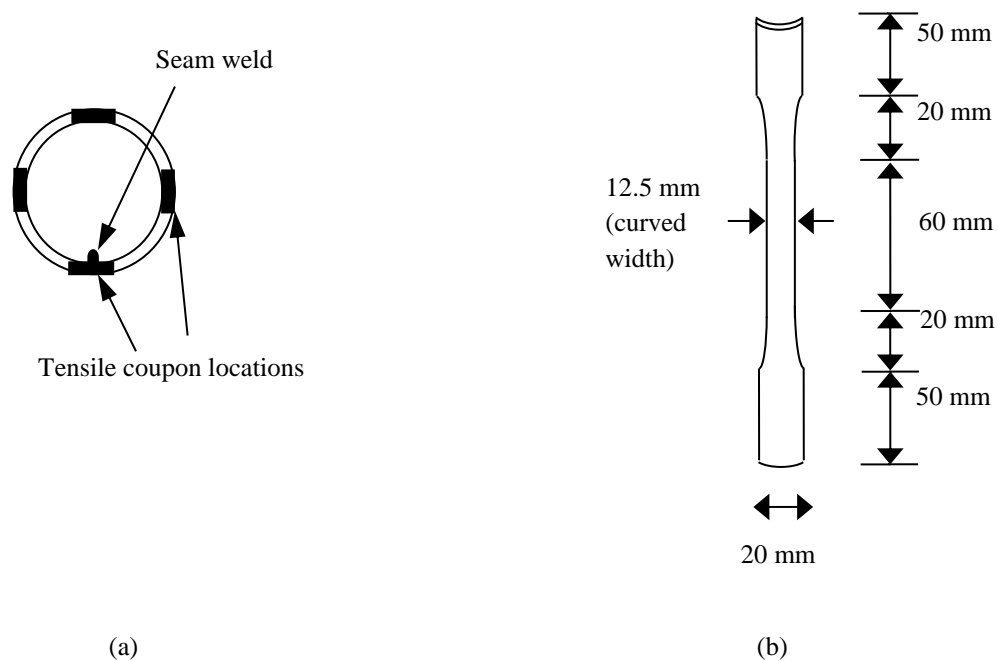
Tensile coupon specimen (a) locations on tubular cross-section; (b) dimensions
